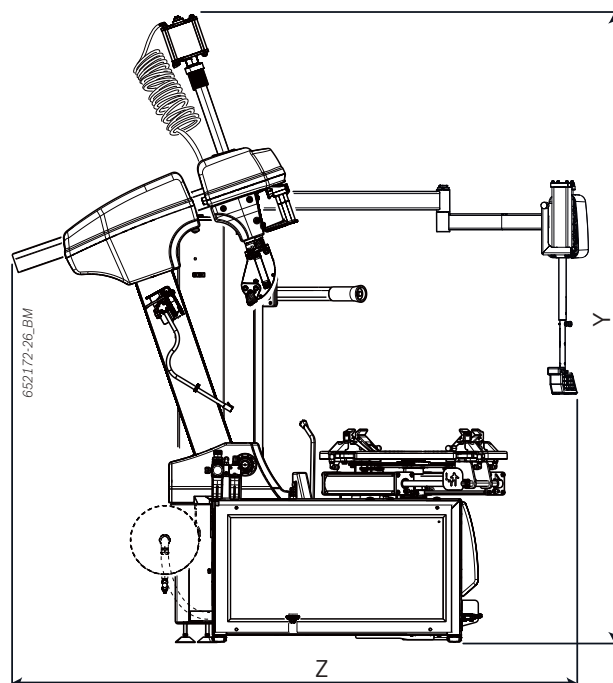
Dimensions - side view of FALCO EVO 628 S (IT) V8
